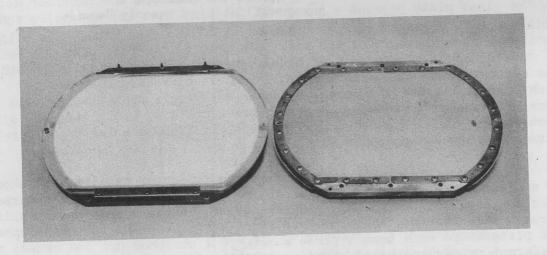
Front and Rear View of Viewing-Screen Assembly.
